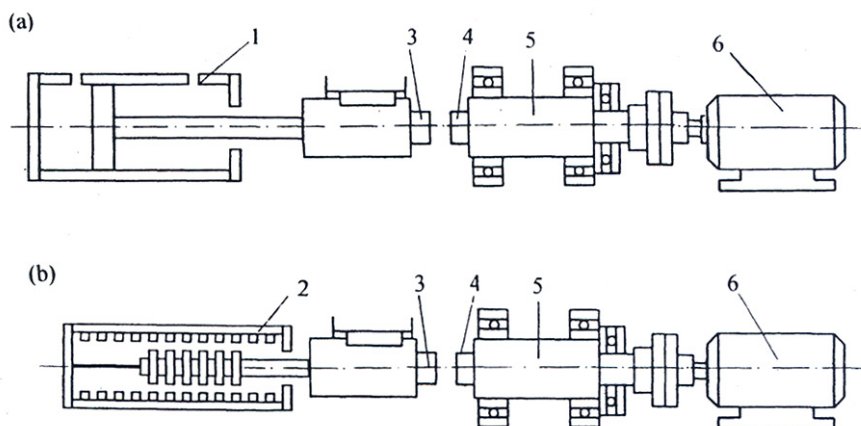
Equipment used for friction welding: (a) with hydraulic or pneumatic actuator, (b) with electric linear actuator. 1 - mechanical actuator, 2 - PM actuator or tubular LSM, 3 - chuck for stationary part, 4 – chuck for rotating part, 5 - spindle, 6 - rotary electric motor.
